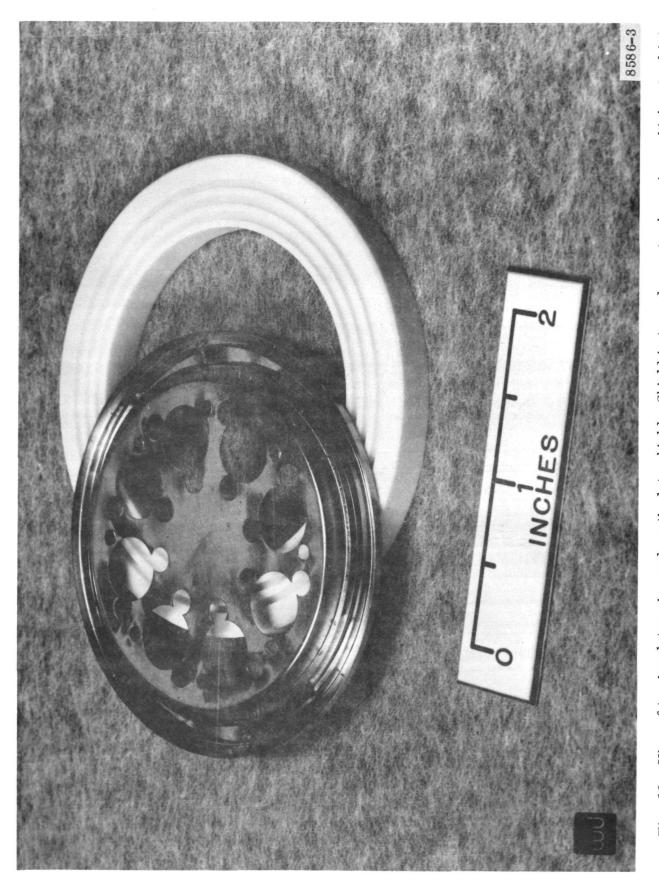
View of top insulator ring and particulate shield. Shield is turned over to show rings which extend into grooves.
